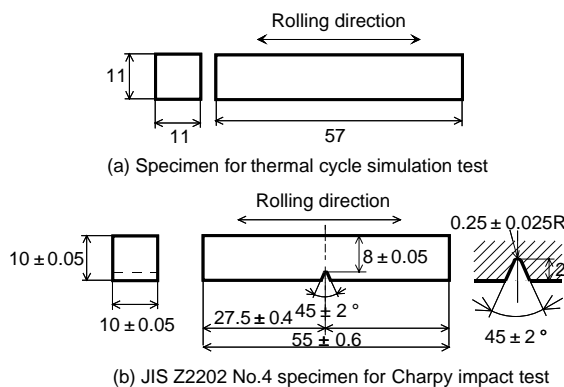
Shape of specimens to simulate welding thermal cycles and Charpy impact test.
